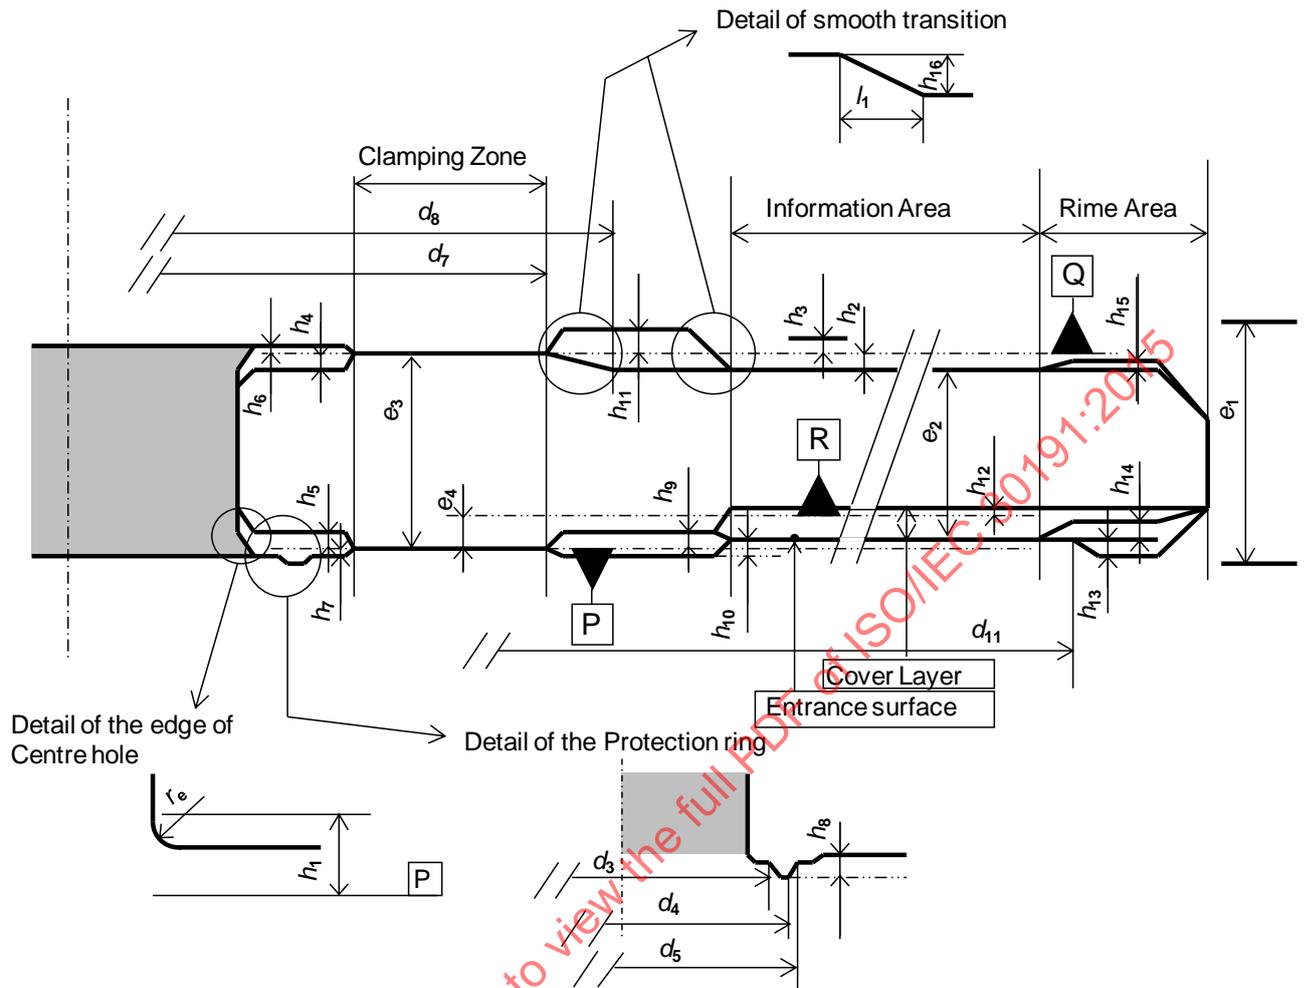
Details of disk dimensions for Type TL disk and Type QL disk
